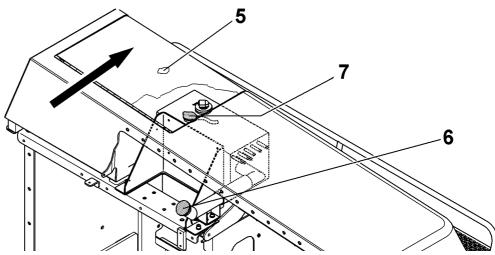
Filler cap and pressure relief valve of the cooling system
